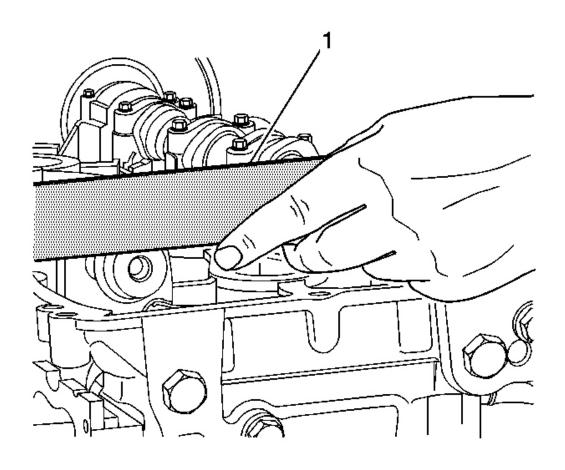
Checking For TDC Position (Method 2) Courtesy of GENERAL MOTORS CORP.
